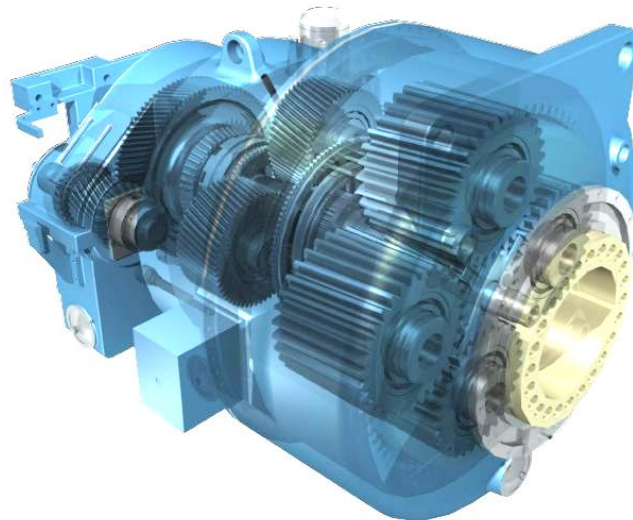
2P 2.9 GE Gearbox, two stage planetary with one stage parallel shaft - Indirect drive system [24].
